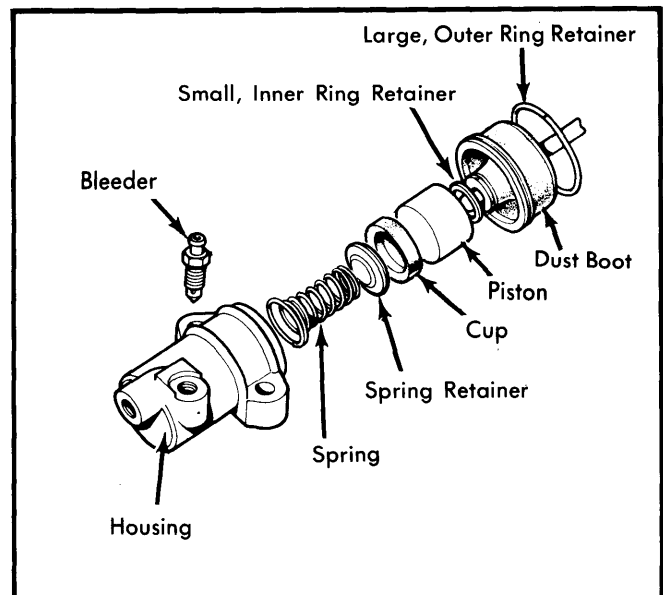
Exploded View of MGB Clutch Slave Cylinder
